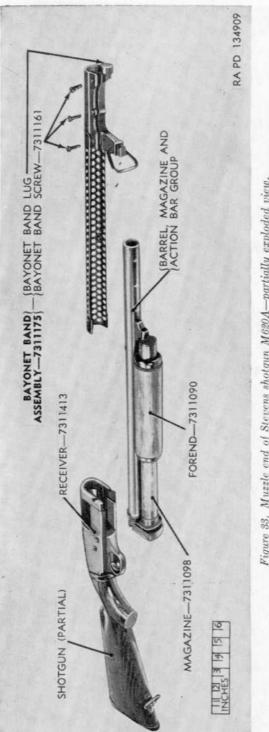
Muzzle end of Stevens shotgun M620A-partially exploded view.
